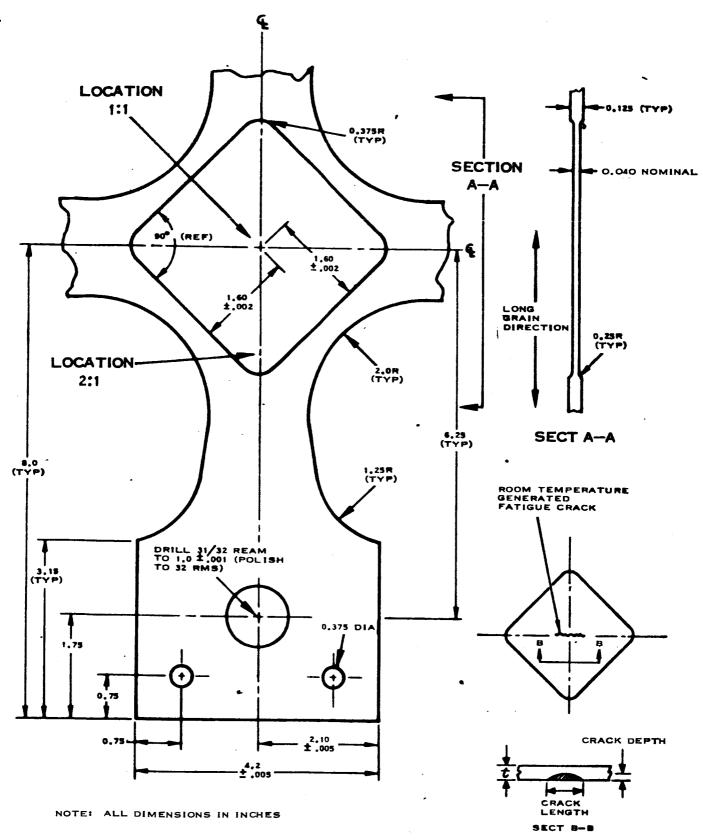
BIAXIAL FRACTURE TOUGHNESS SPECIMEN
